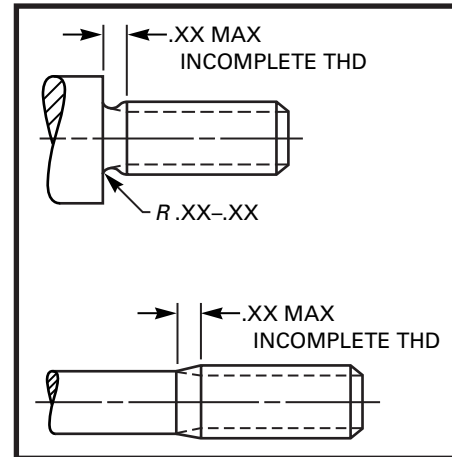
SPECIFYING SHANK AND INCOMPLETE THREAD LENGTHS
